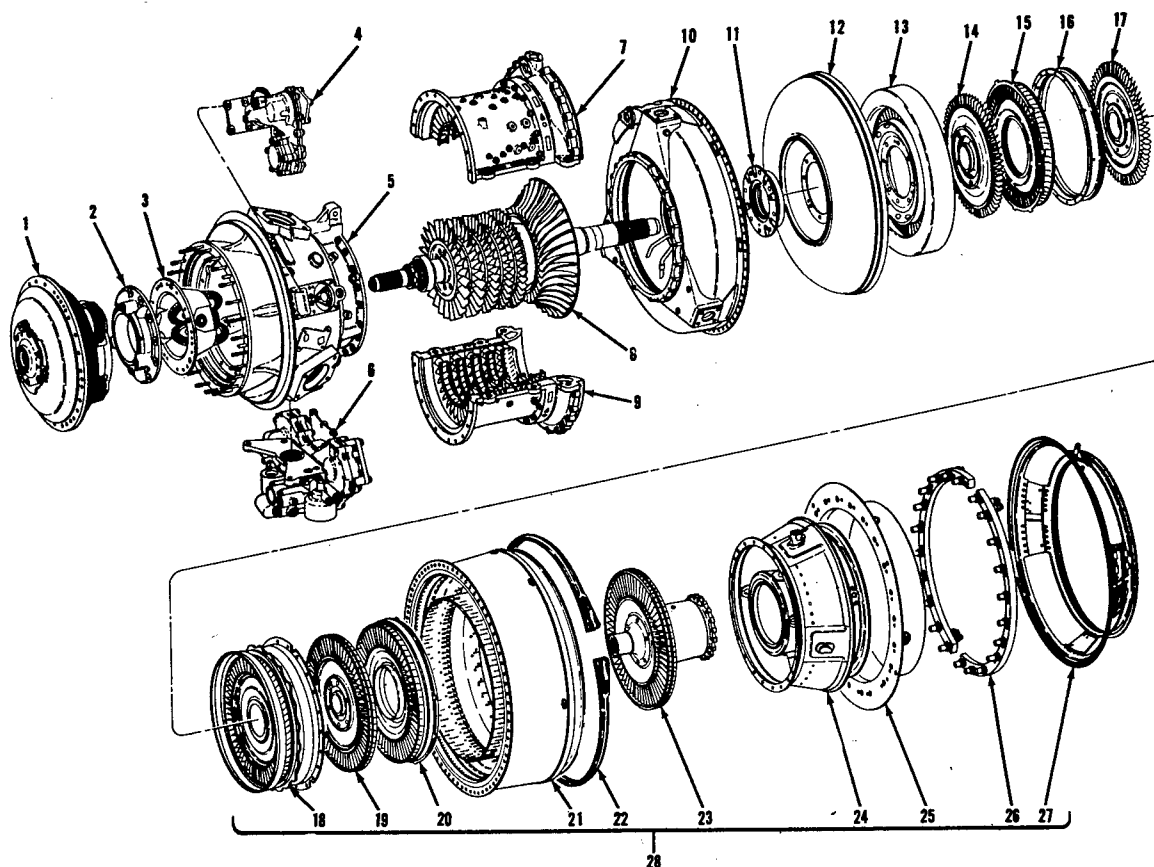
Engine Major Assemblies (Typical) (T53-L-13 Series)
